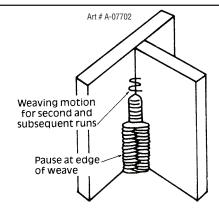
Multi Run Vertical Fillet Weld
